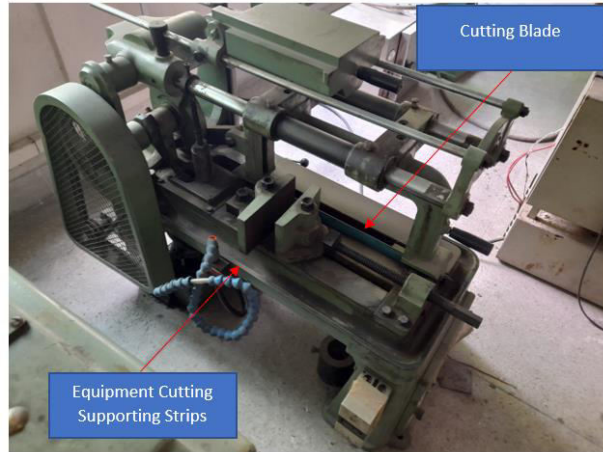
Electric Saw Equipment for cutting sides of testing strips
